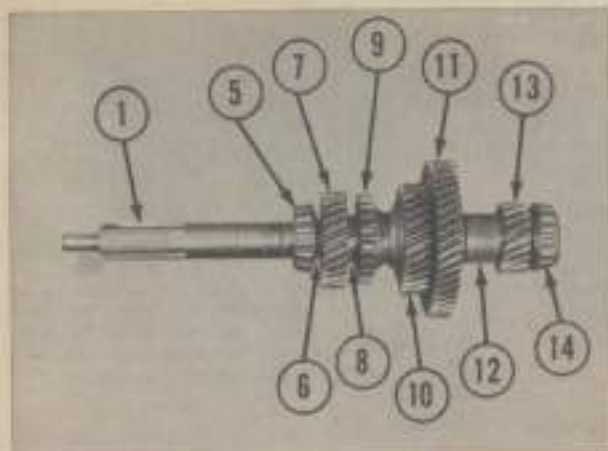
The D-14 and D-15 transmission main shaft removed, showing gears, bearings and spacers. Refer to Fig. 115 for legend.
